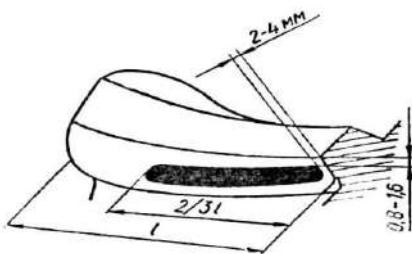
Correct placement of contact spot on tooth of pinion gear
